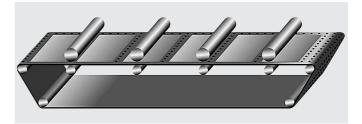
Conceptual drawing of one piece belt type carrying conveyor
